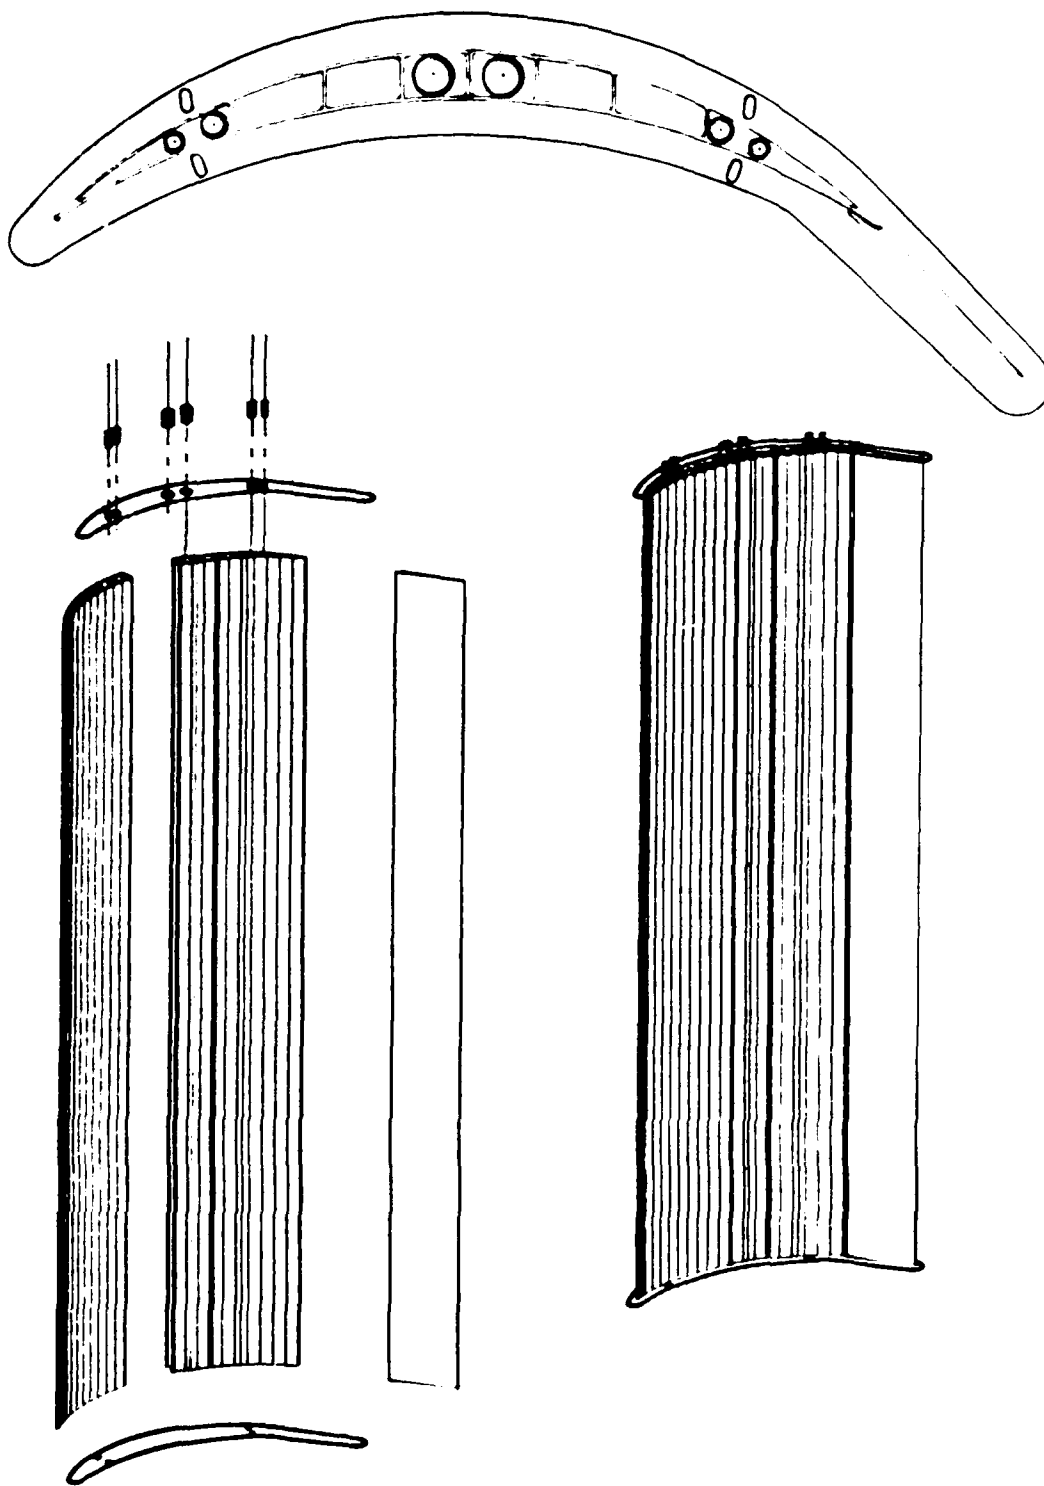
Drawing of single cooling-vane assembly with cross-section view showing internal vane partitions.
